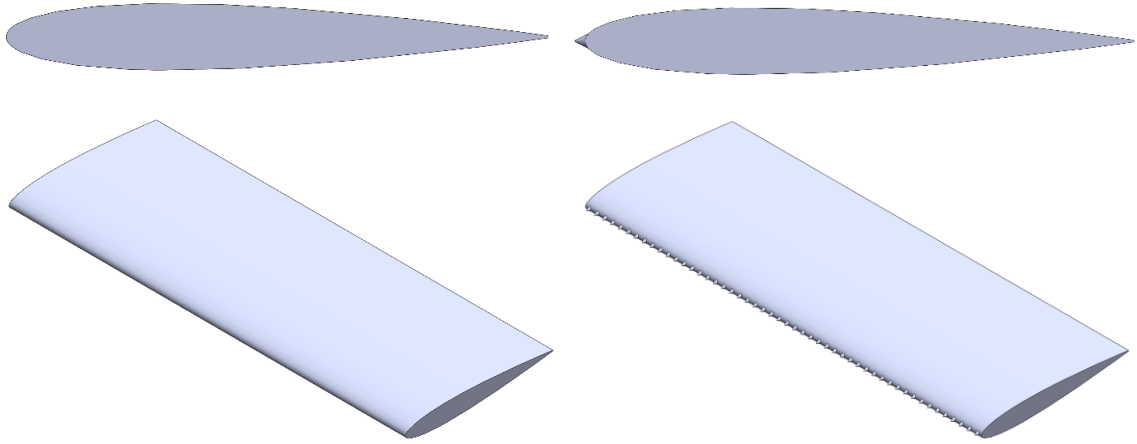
Cross sectional view and isometric view of the (left) clean wing and (right) tubercled wing.
